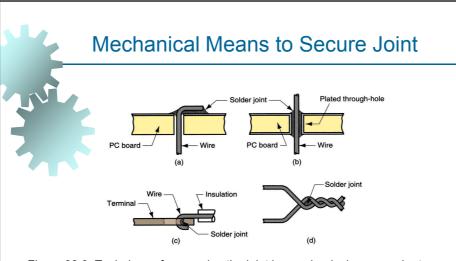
Techniques for securing the joint by mechanical means prior to soldering in electrical connections: (a) crimped lead wire on PC board; (b) plated through-hole on PC board to maximize solder contact surface; (c) hooked wire on flat terminal; and (d) twisted wires.
